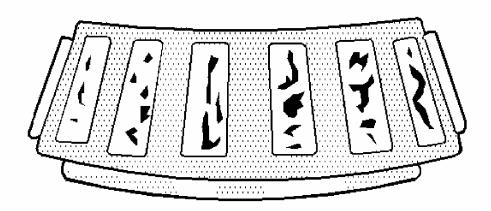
Inspecting Bearing Rollers & Races For Pitting, Grooves, Spalling & Excessive Wear
